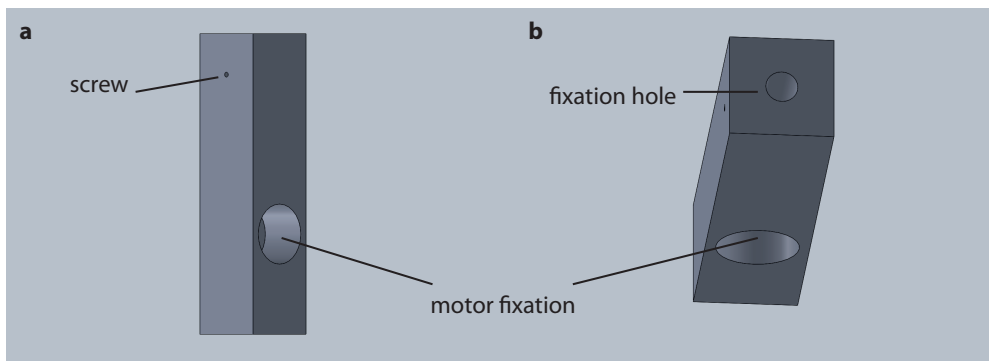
The fixation part connected to the shaft of the stepper motor. a) Side view of the part, the small bar connected to the sample rod was fixed with two screws. b) Top view of the part, the fixation hole is hosting the small bar. The front hole is glued to the shaft of the motor.
